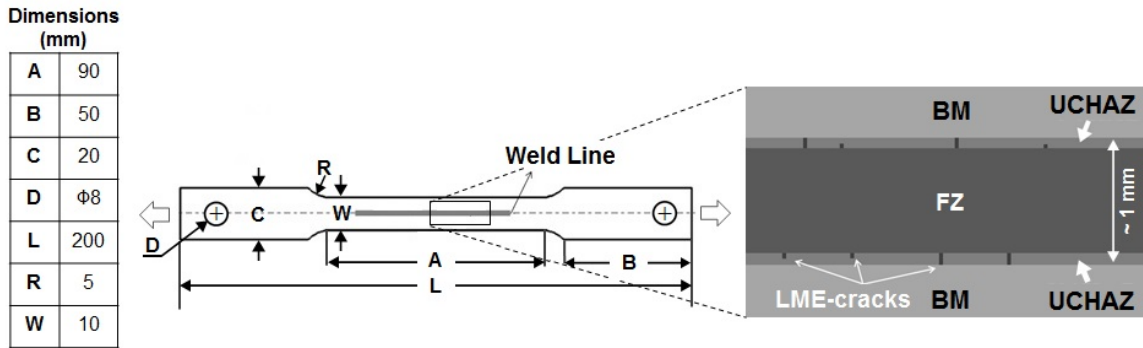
Schematic illustration of the specimen, weld line configuration and the observed LME-cracks within the UCHAZ (weld line: 50mm in length) (BM: Base material, FZ: Fusion zone, UCHAZ: Upper-critical heat-affected zone).
